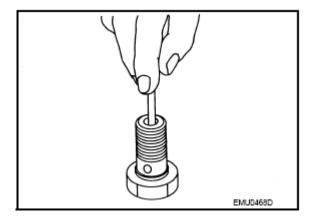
Checking Oil Jet Relief Valve Using Plastic Stick Courtesy of NISSAN NORTH AMERICA, INC.
